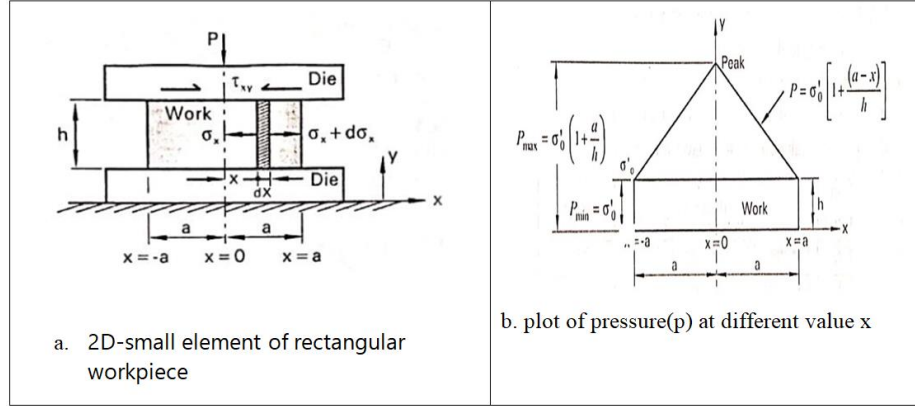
a forging of rectangular work piece and its forging pressure distribution[26]
